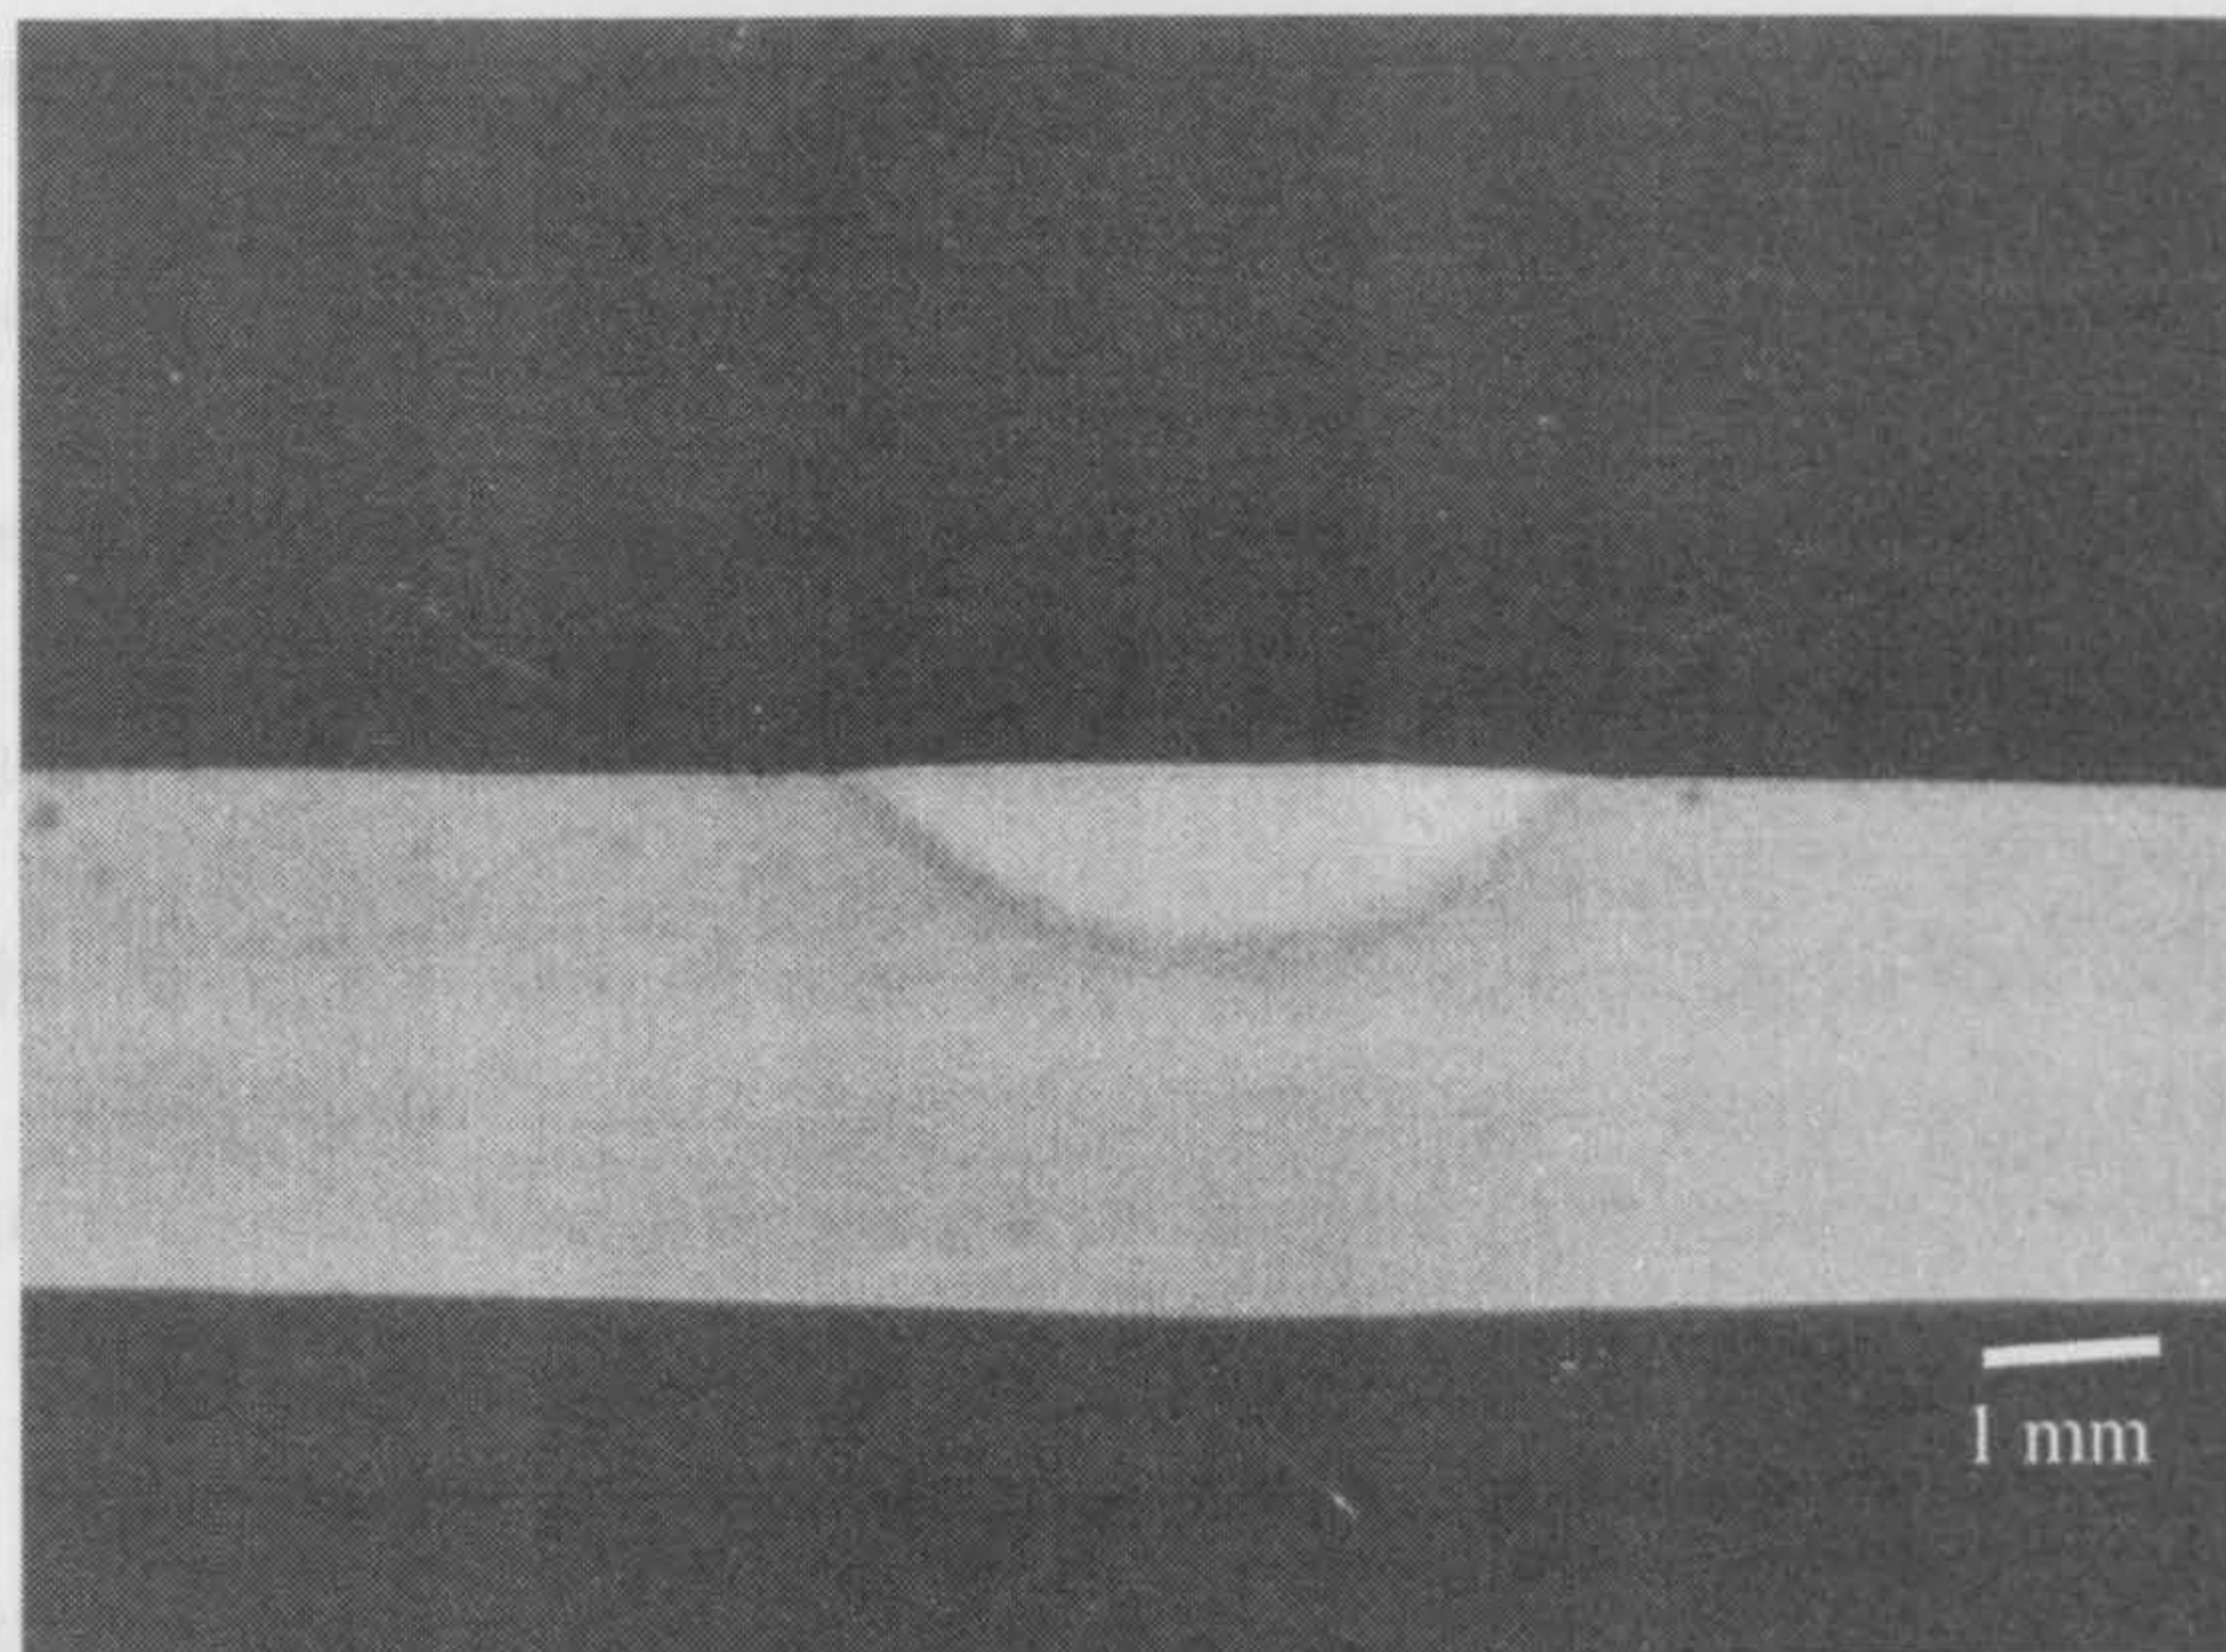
TIG weld using the following parameters,  $I = 120\text{A}$ ,  $v = 380\text{mm/min}$
